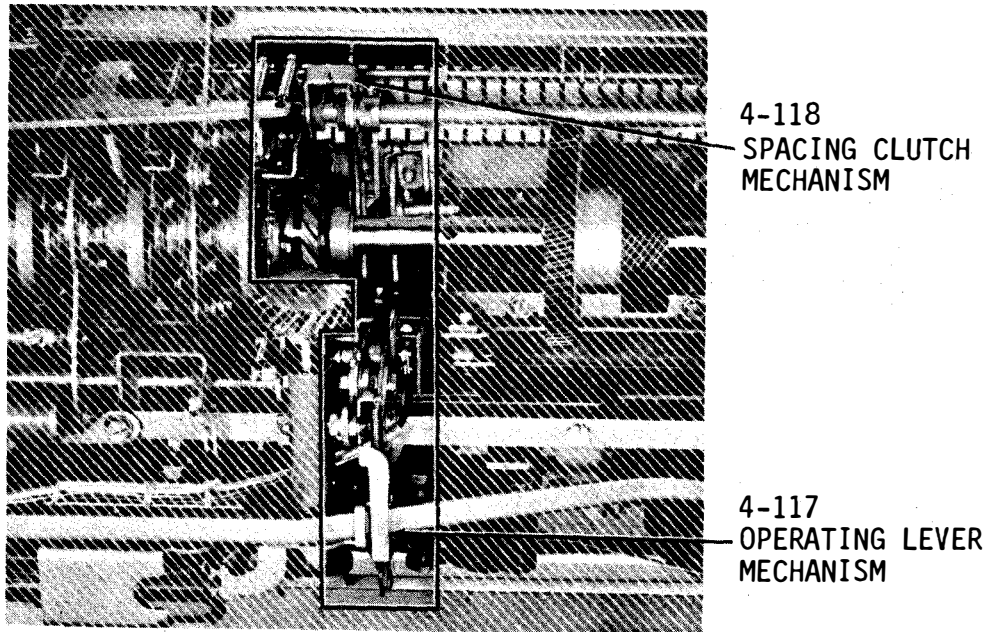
Horizontal Tabulator Mechanism, (Early Design) Bottom View
